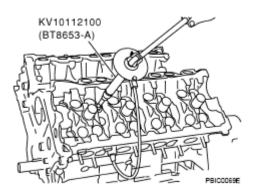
Checking Tightening Angle Indicated On Angle Wrench Indicator Plate Courtesy of NISSAN MOTOR CO., U.S.A.
